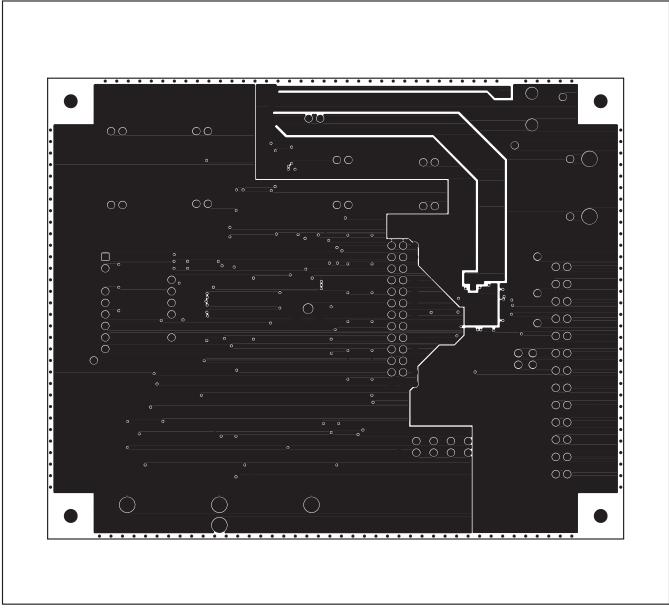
MAX9853 EV Kit PCB Layout—Inner Layer 2
